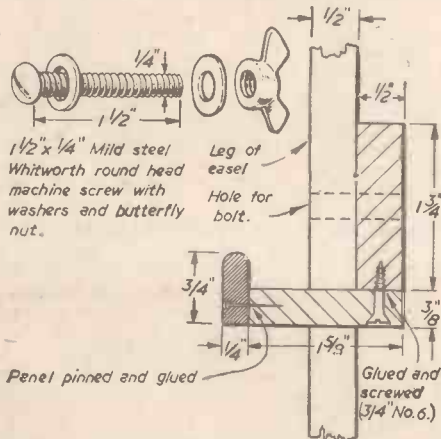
Section through chalk ledge showing butt joint between horizontal brace and leg; also one of the bolts with washers and butterfly nut.
